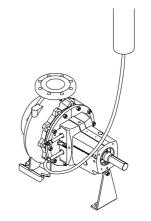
Tandem seal arrangement with a dead-end flushing-liquid supply
